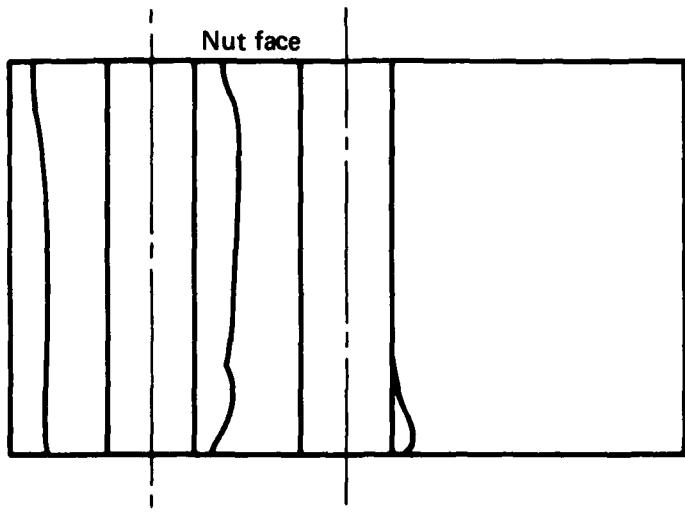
(b) FRACTURE SURFACES: SPECIMEN TYPE (B)
